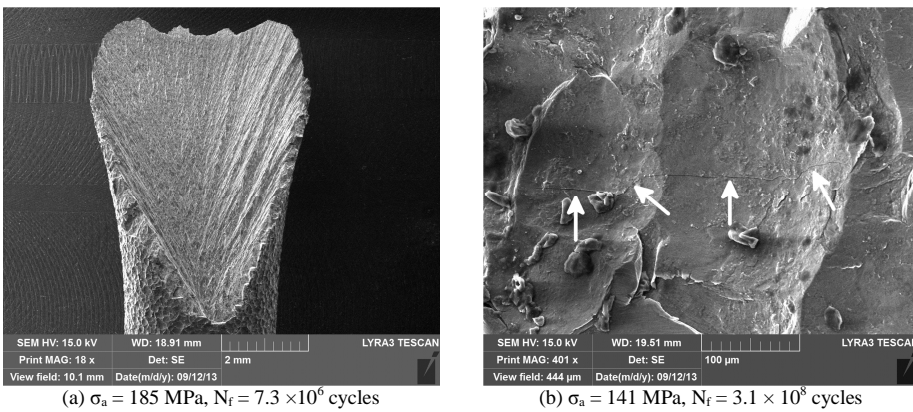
Fracture surface of 14.9A/650 % shot peened specimen in macro view (a) and detail of another initiated fatigue crack under the main crack initiation site (b).
